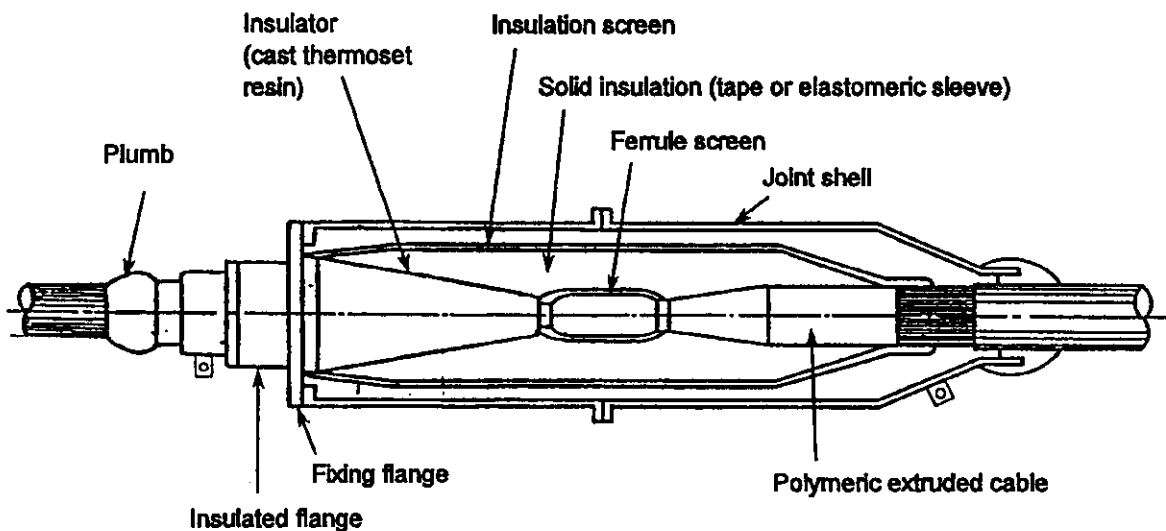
'Back-to-back' joint with one insulator and solid insulation
